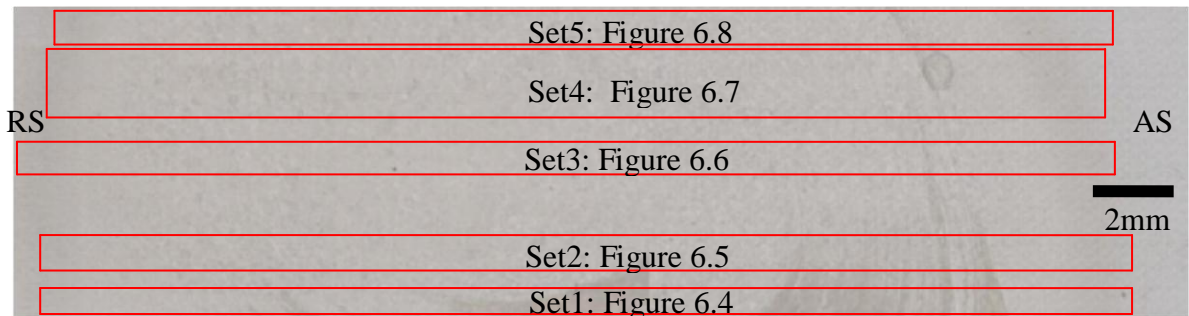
Illustration of the five sections obtained from the whole weld zone of W4C4
